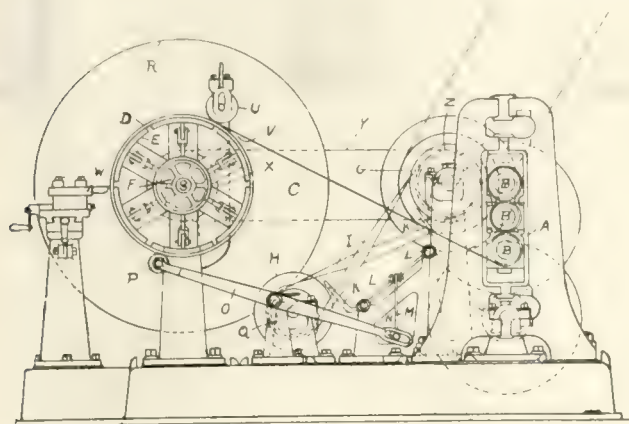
SIDE ELEVATION OF BRIDGE TIRE MACHINE.
